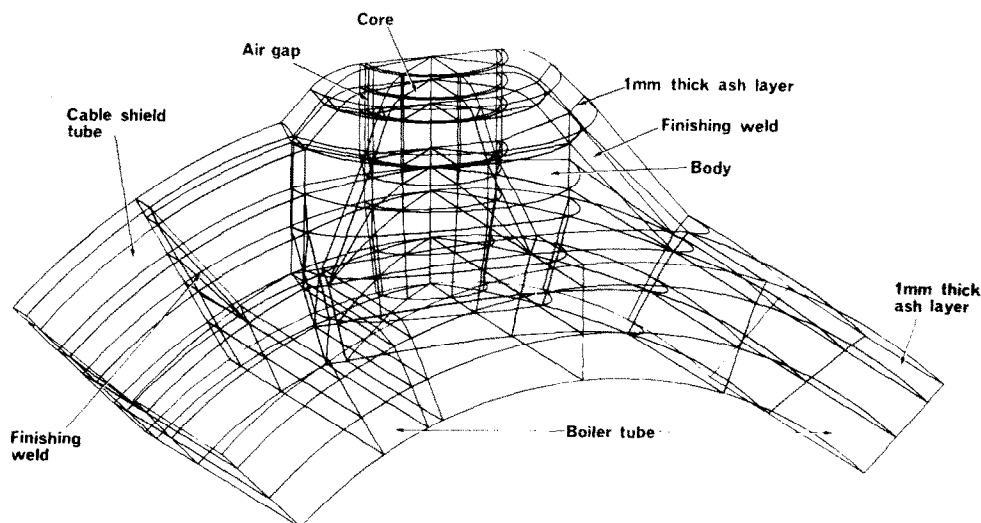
Finite element representation of a Dometer half-section mounted on a boiler tube.
